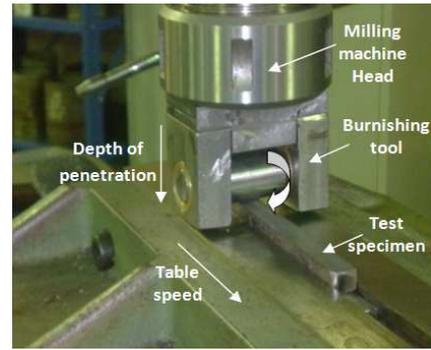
Mounting of roller burnishing tool on the universal milling machine
